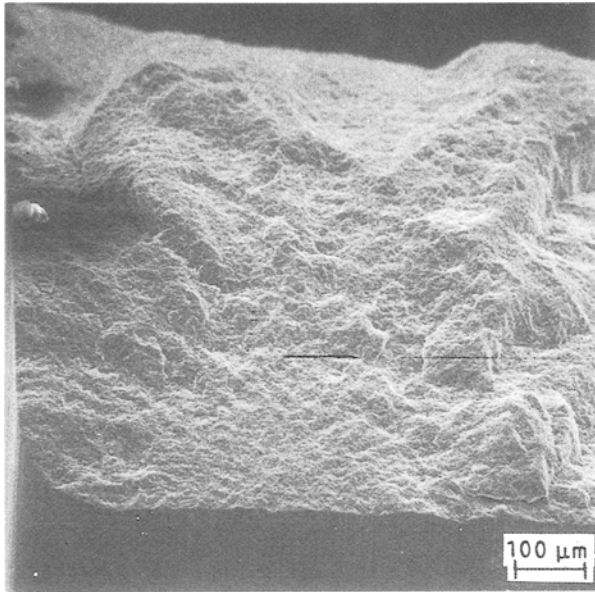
Lower magnification of Fig. 4 showing fracture origin.
